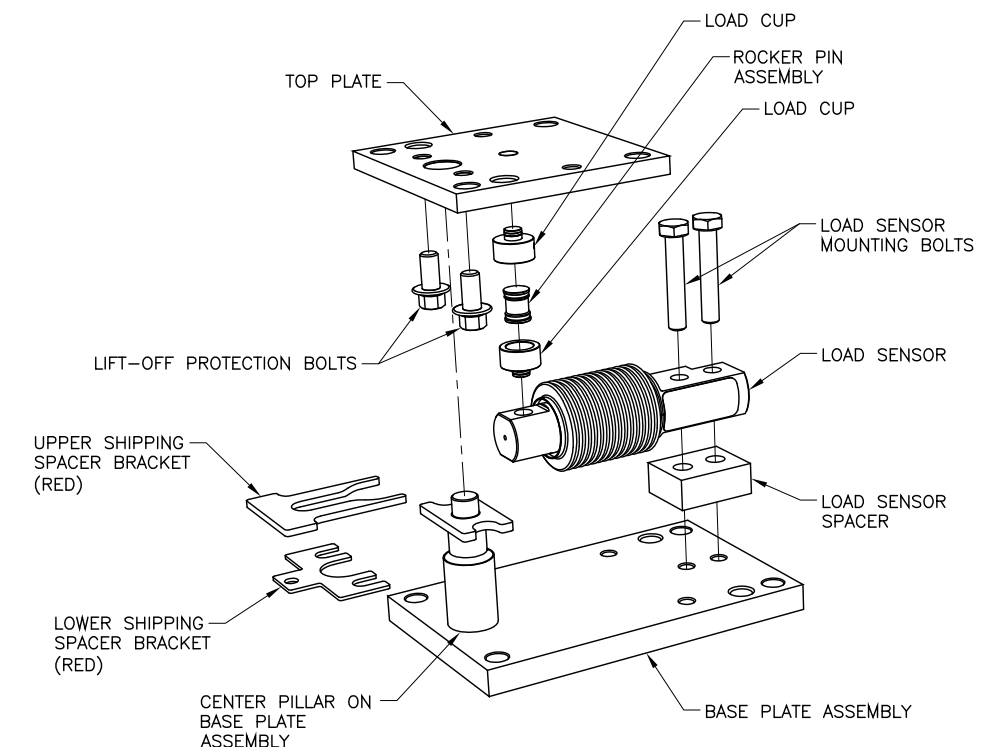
WELDED LOAD POINT MODULE (GROUNDING STRAP NOT SHOWN)
